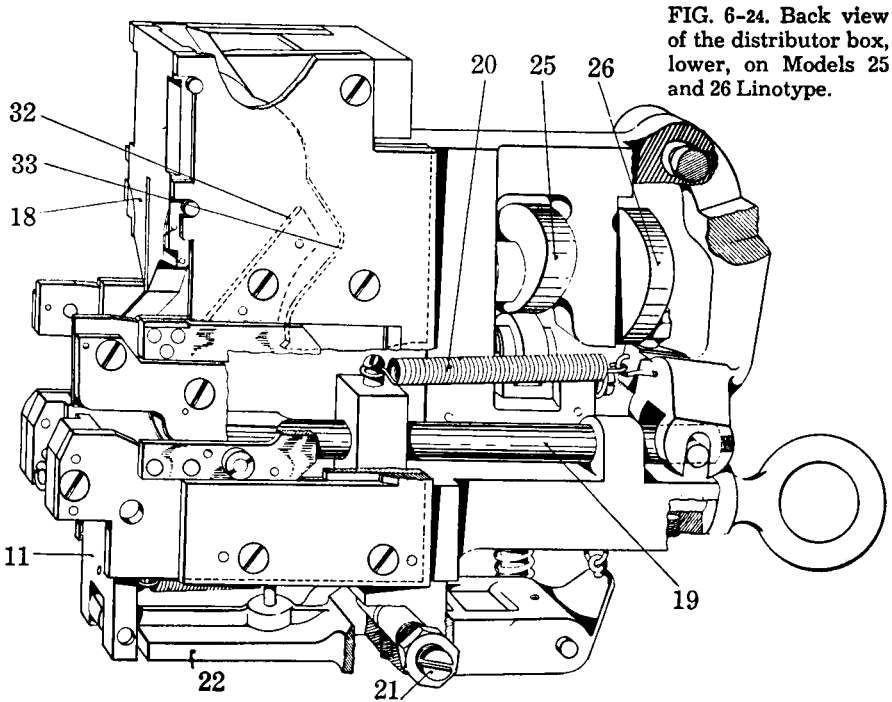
Back view of the distributor box, lower, on Models 25 and 26 Linotype.
